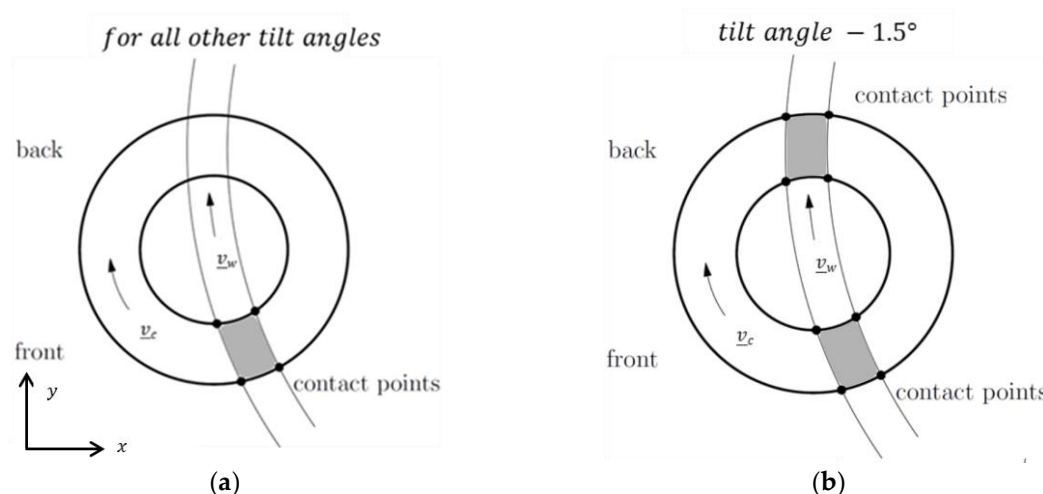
One-sided contact (a) and double-sided contact; (b) of the grinding wheel after initial self-sharpening.
